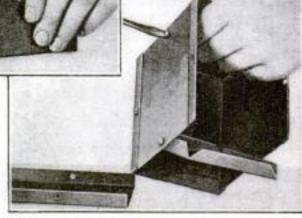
Putting the top in. Note how the bottom is pivoted on two bolts
